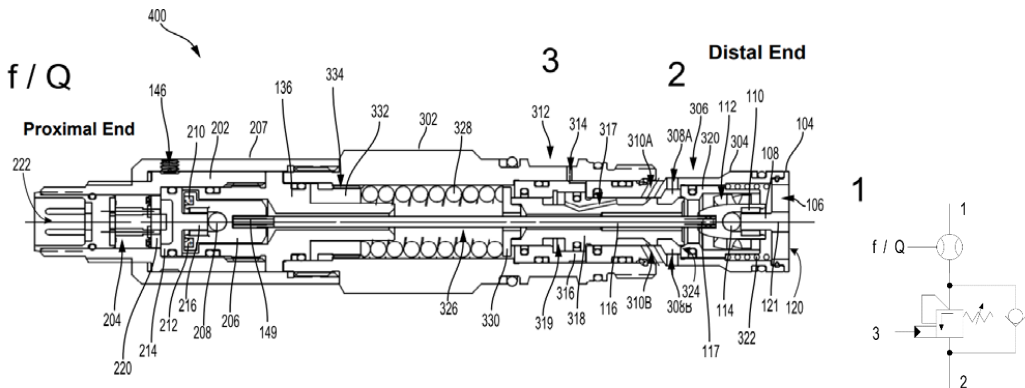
Cross section of an adjustable counterbalance valve with integrated turbine as flowmeter (Pat. Pending)
